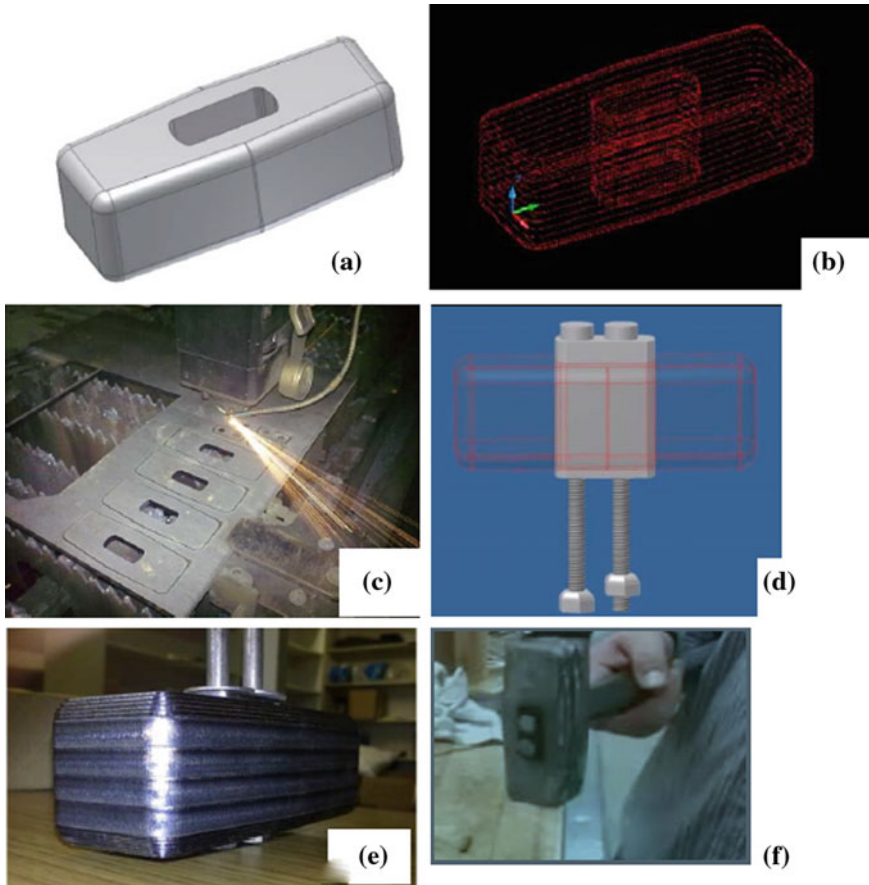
General steps for the fully dense freeform fabrication (FDFF) method for a demolition hammer head: a 3D solid modelling a adaptive slicing b abrasive water jet cutting or laser cutting c alignment tooling design d bonding layers (e), and final product test (f) (Glen et al. 2011)
